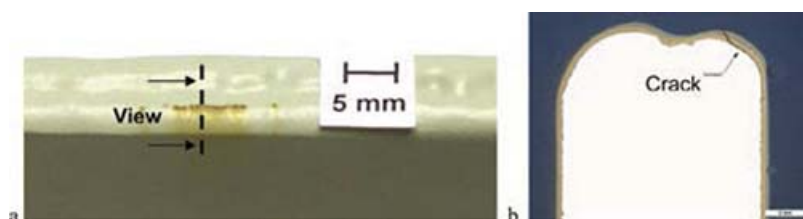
Sample with cracked edge coating a - General view; b - Polished cross section
